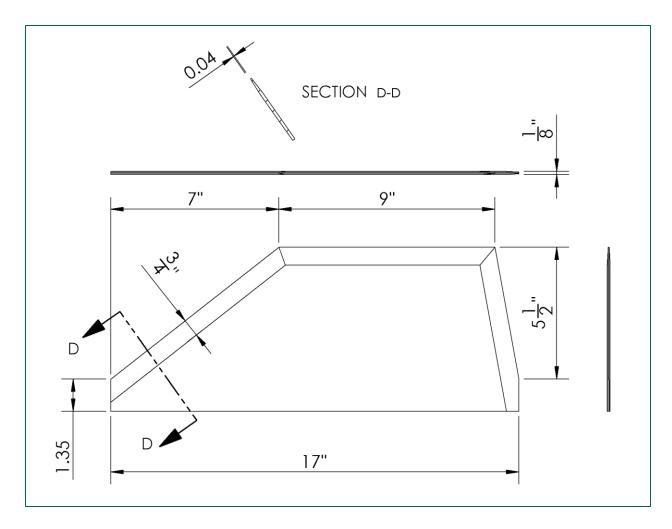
Dimensioned drawing of preliminary trapezoidal 1/8" fin shape.
